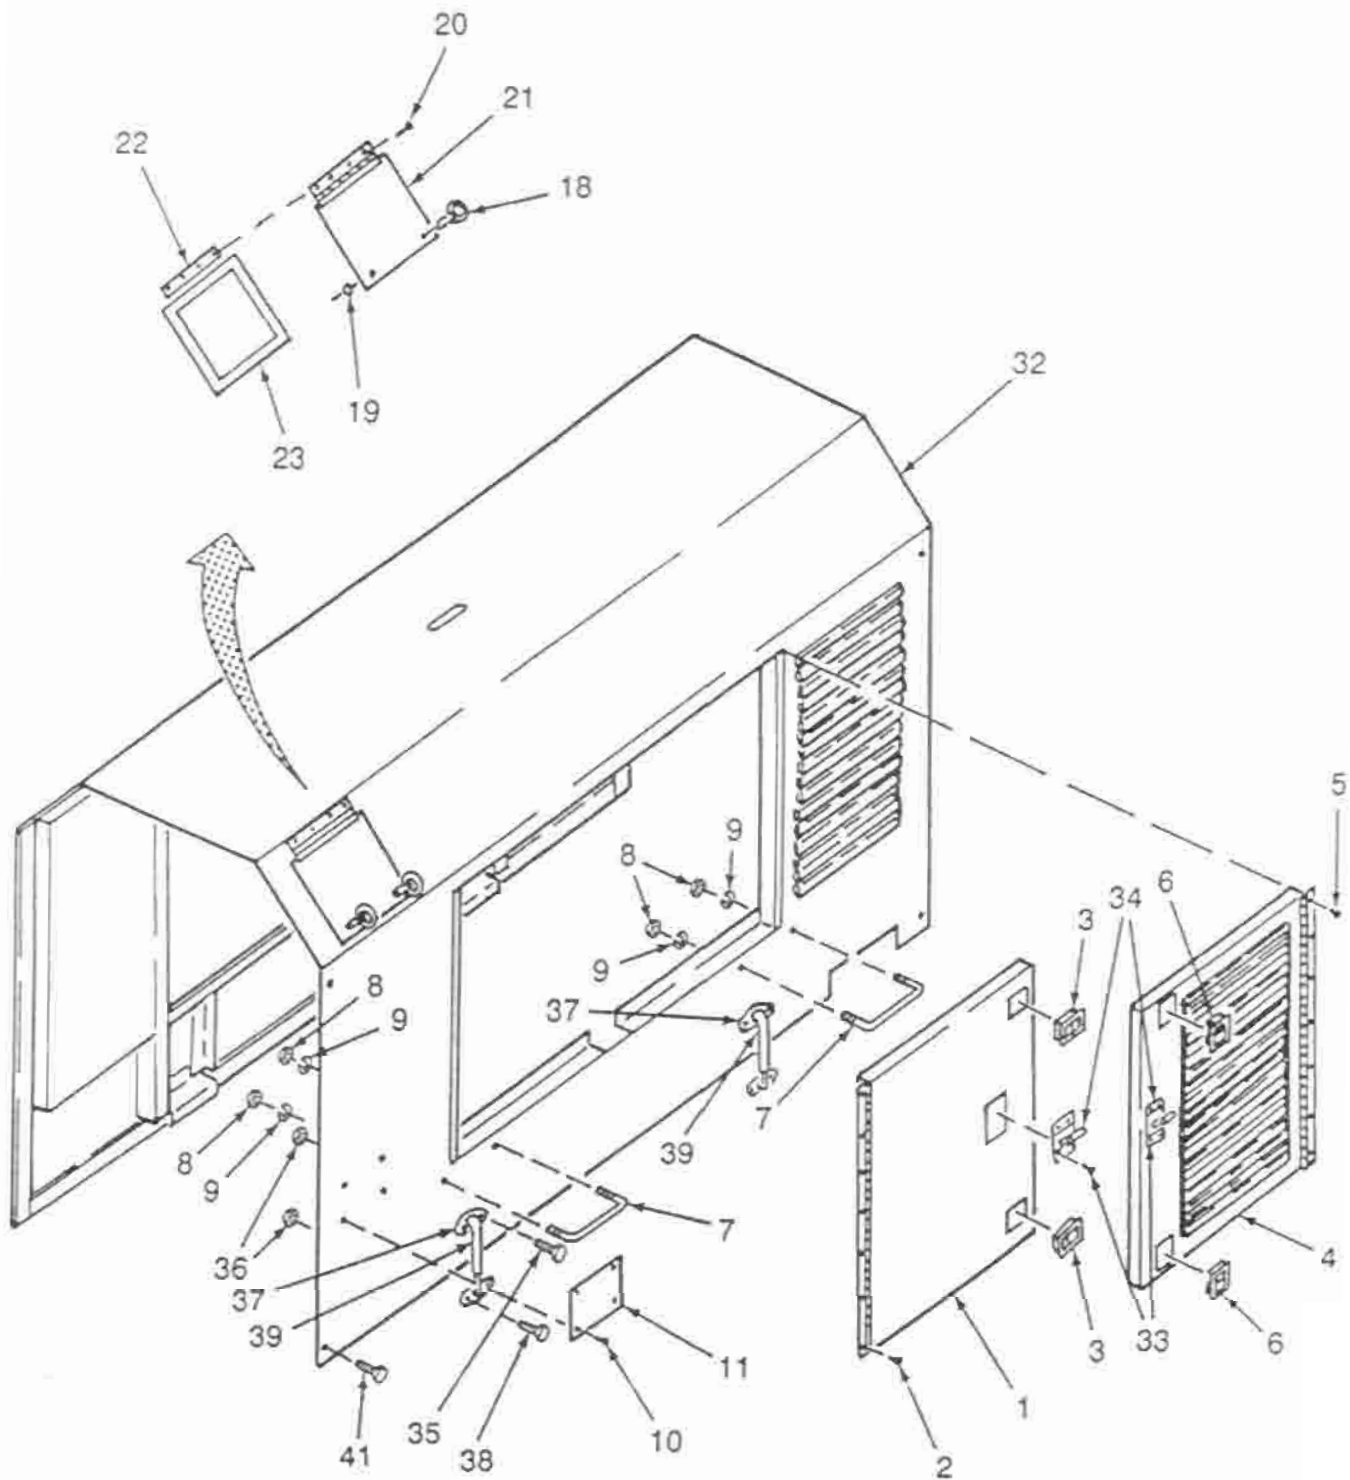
Roof Assembly (Sheet 1 of 3)
